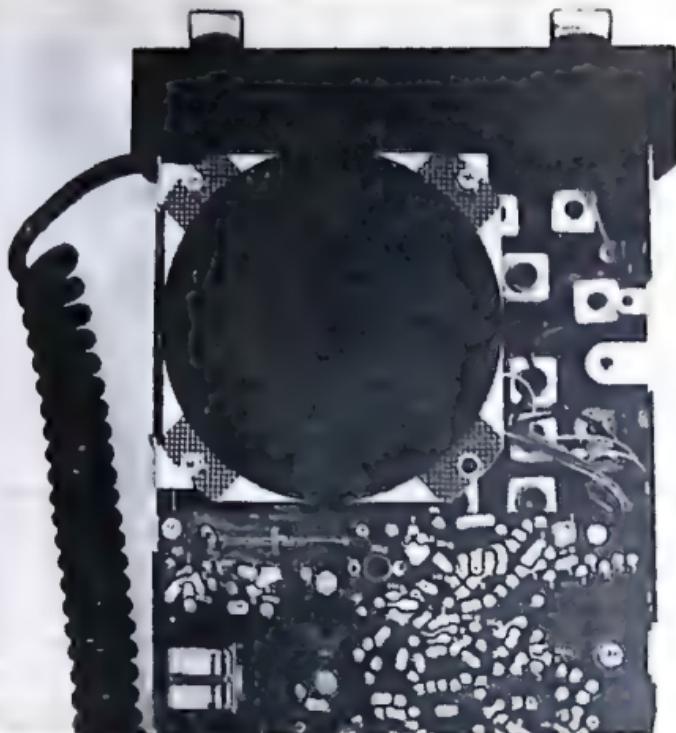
Top view of the Mocom reveals a compact unit which is easily serviced. The 3 screws holding the speaker can be removed, allowing the speaker to be folded back out of the way for access to the unit. The PC board adjacent to the speaker is a tone-encoder unit.
